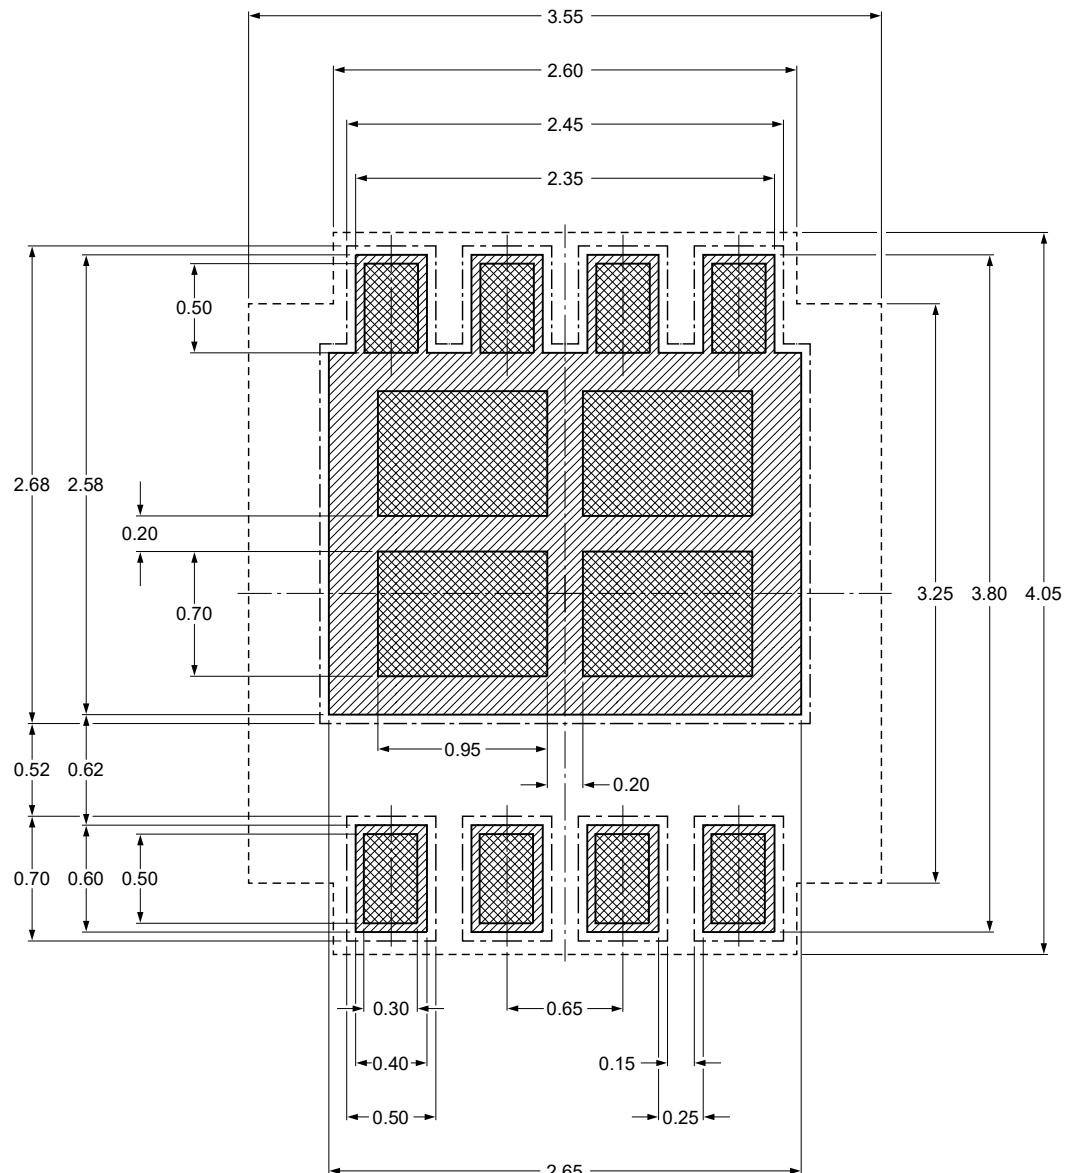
Package outline MLPAK33 (SOT8002-1)
